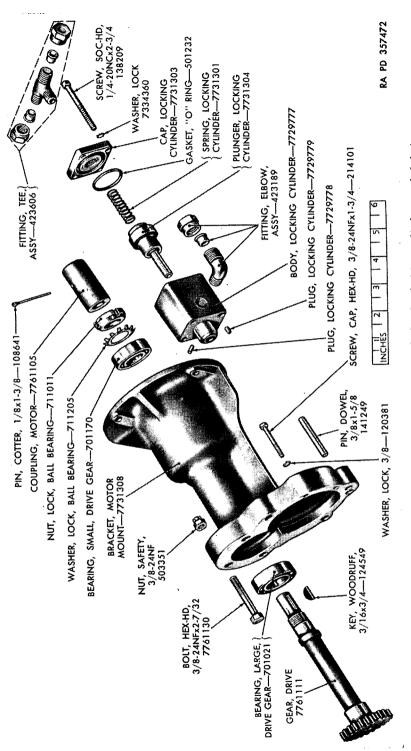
Motor mounting bracket, drive gear and hydraulic locking cylinder, exploded view.
